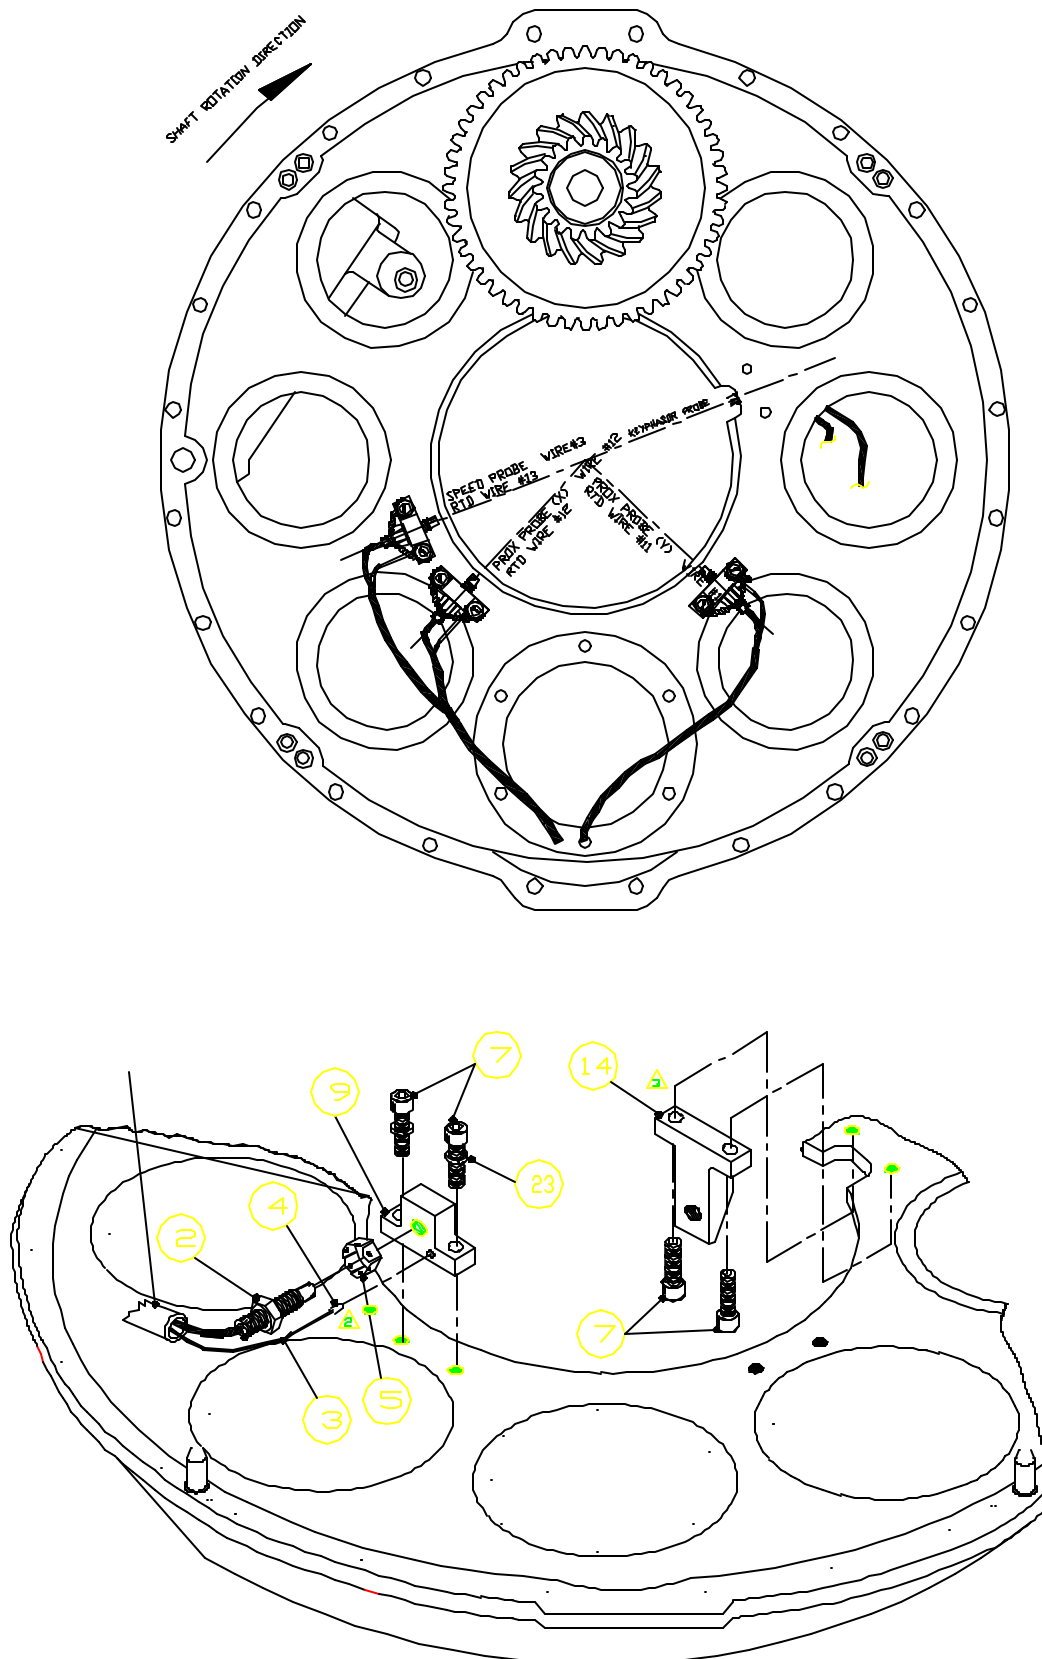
Rear half of internal wheel case, looking aft, showing shaft probes and speed probe (top). Bottom detail shows one shaft probe and mounting bracket for initially proposed Keyphasor® probe.
